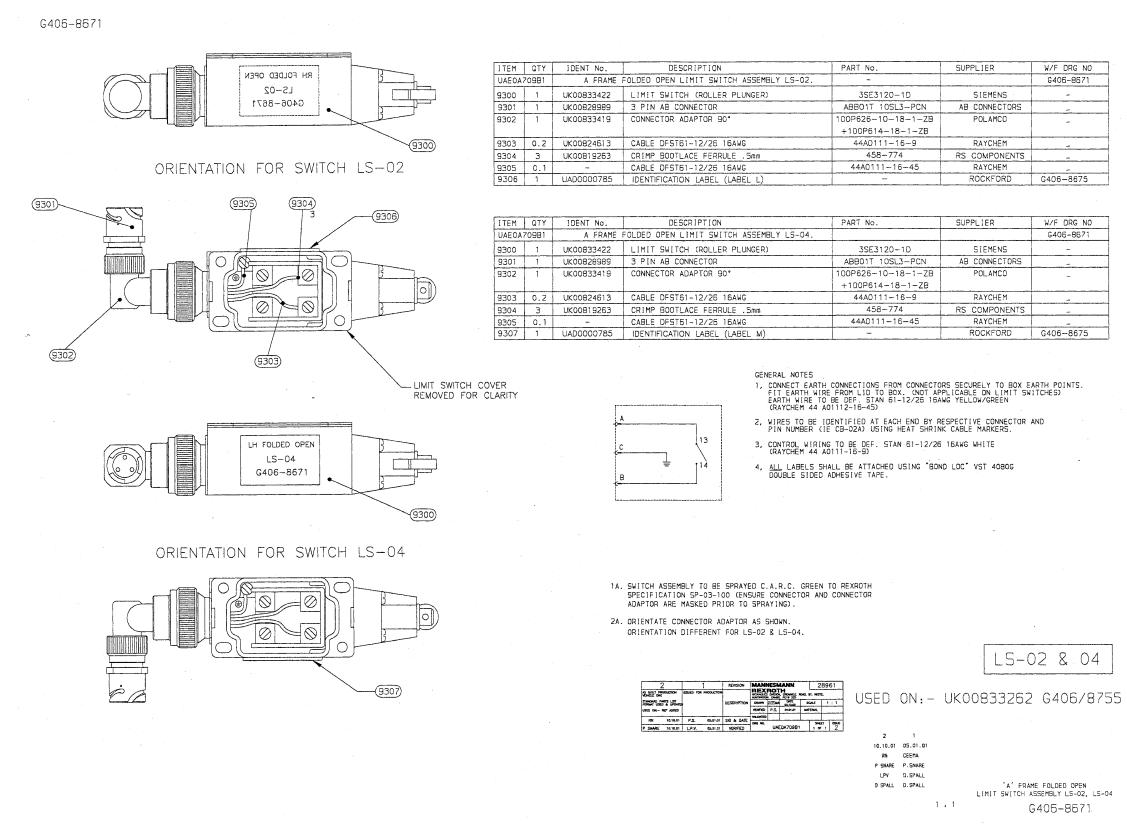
A-FRAME FOLDED OPEN LIMIT SWITCH ASSEMBLY LS-02, LS-04
